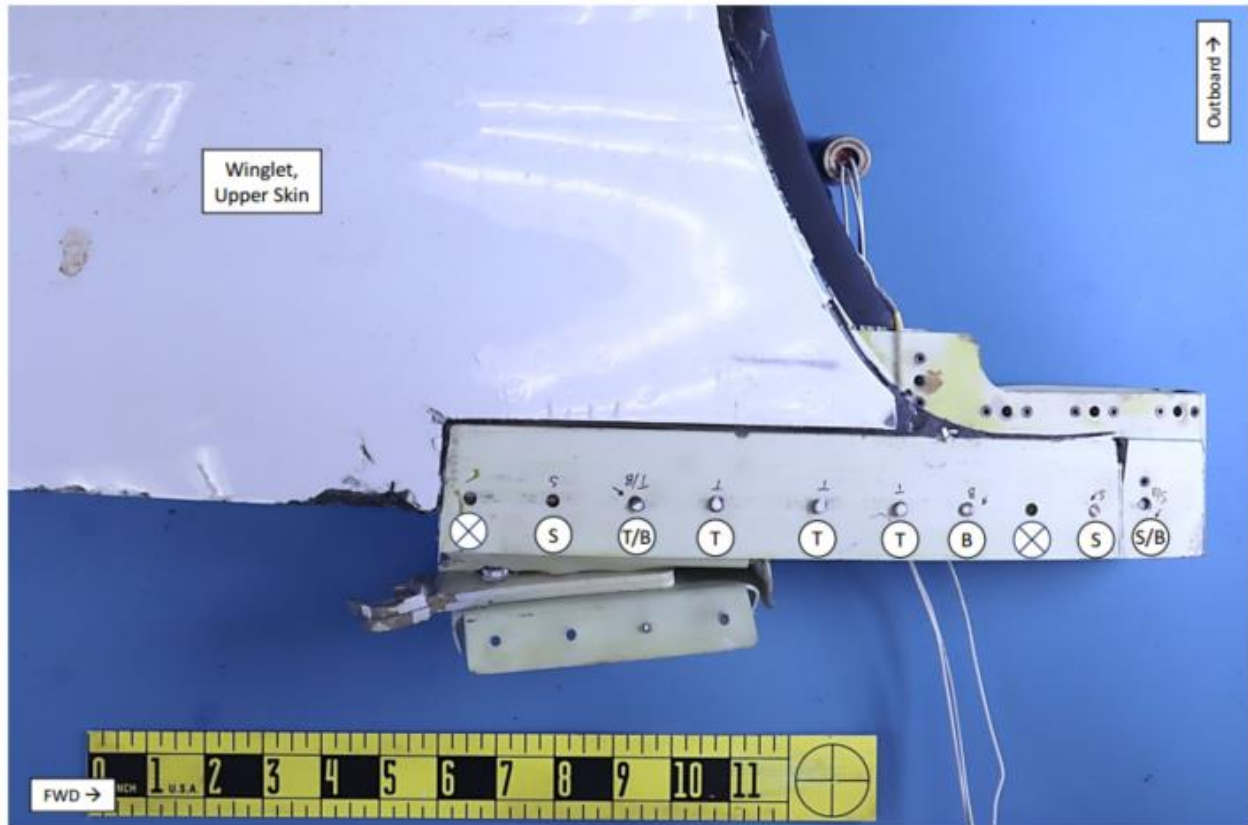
Schematic of the wing extension upper skin-to-winglet attachment rib fastener conditions. Fractured fasteners are identified by an open circle, missing fasteners by a circle with an “X” and intact fasteners by a filled circle. Fracture designations are T = tensile fracture mode, S = shear fracture mode, B = mixed mode bending fracture used in conjunction with T or S as applicable.
